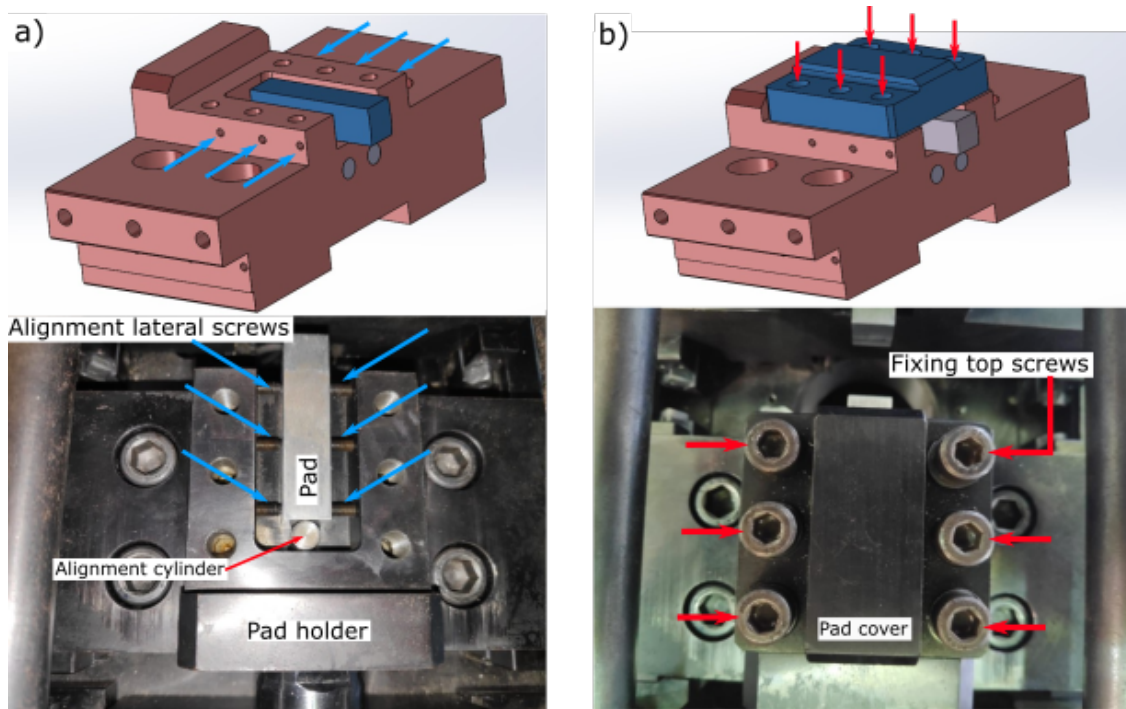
CAD drawing and photos of the pad holder and the cylindrical pad. a) Blue arrows indicate the lateral screws used to align the fretting pads, and b) red arrows indicate the top screws used for blocking any pad slip within the slot.
